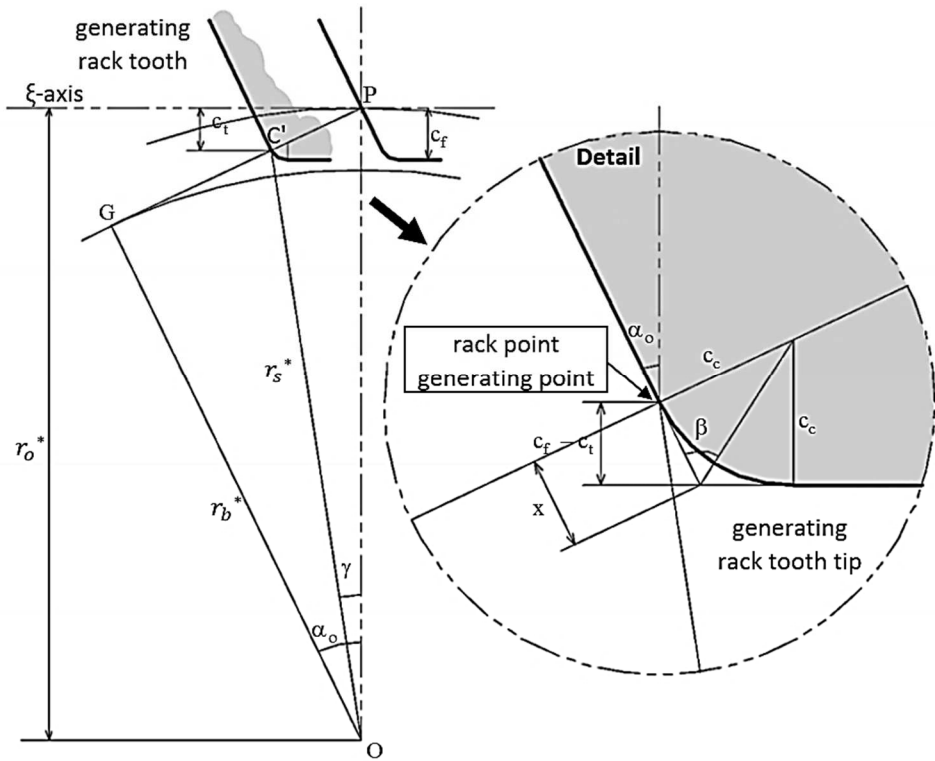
Analysis of gear cutting at the tooth fillet (gear not shown, only rack cutter tooth shown for clarity)
